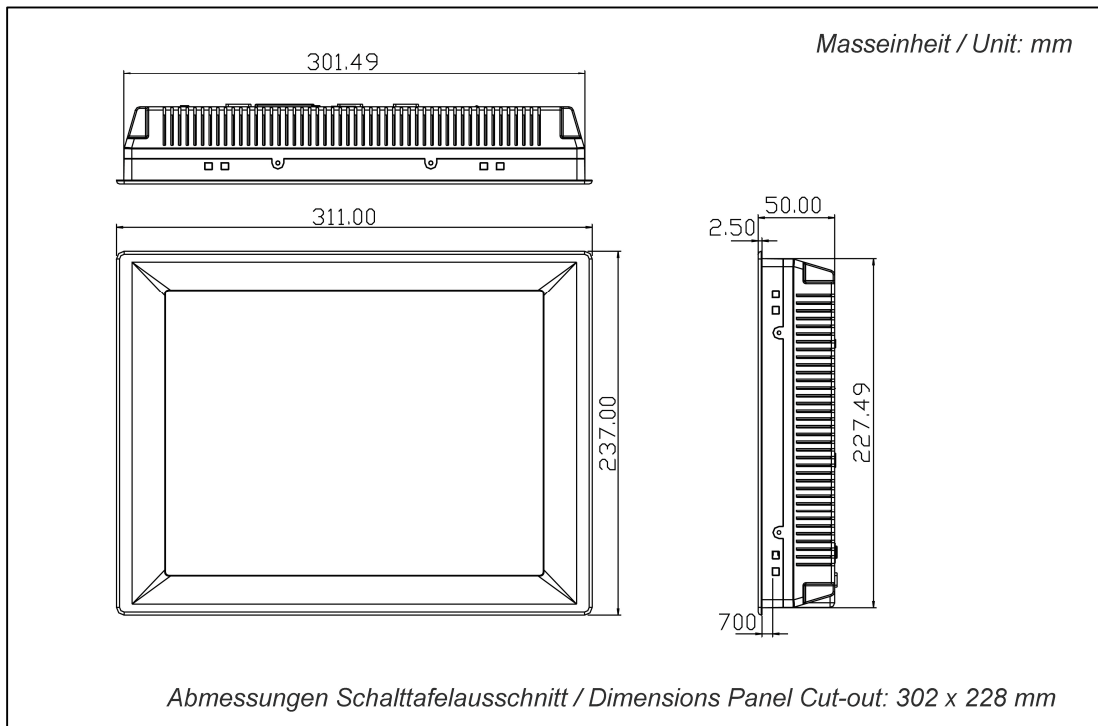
KS vario BT 12 dimension drawing, all dimensions in mm
